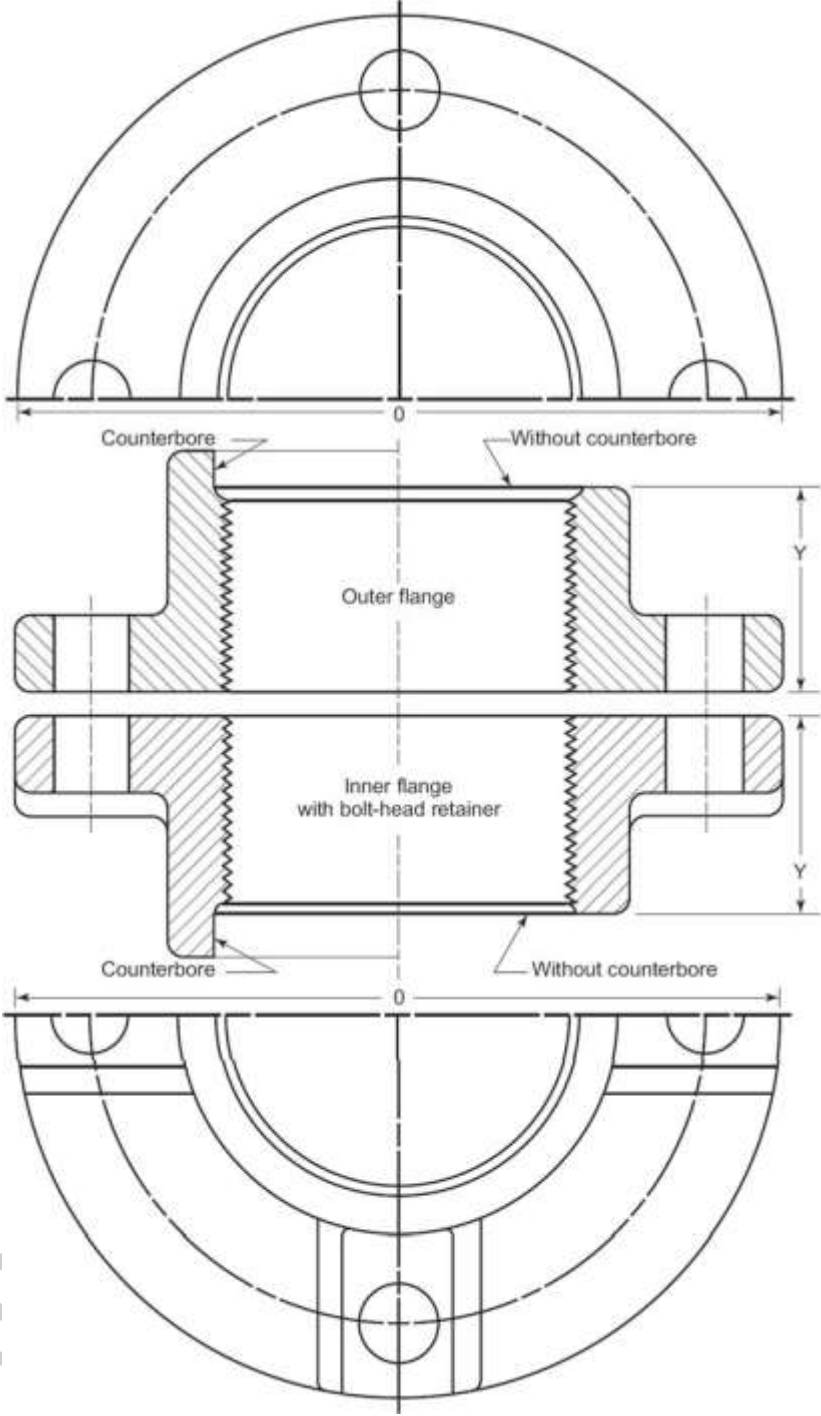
Bolted Piping Flanges (see Table 3 for dimensions)
